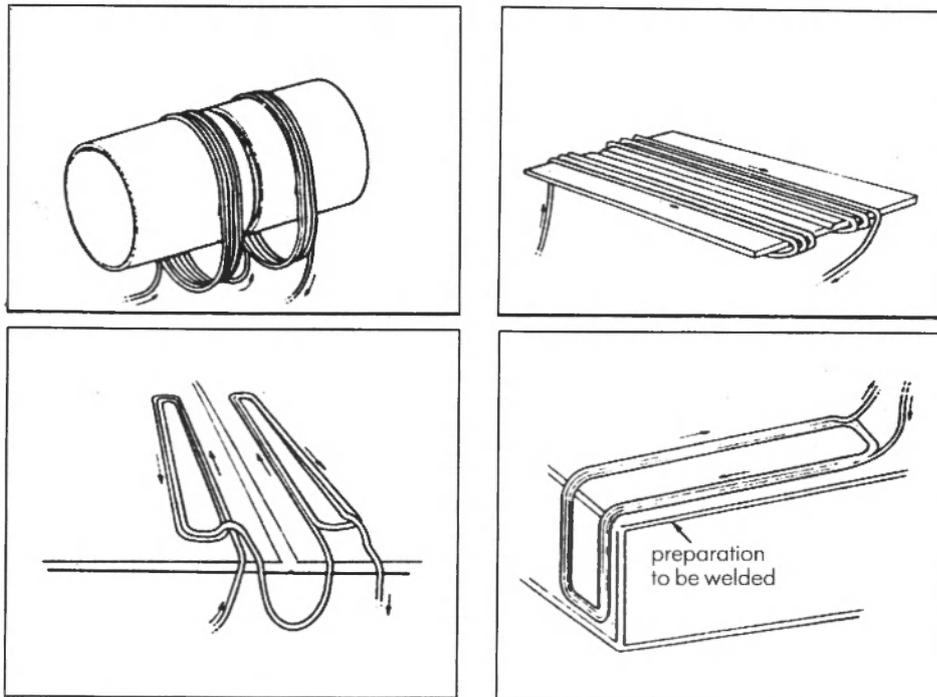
Demagnetising Cable configurations. Arrows indicate current directions, which should always be parallel to weld preparation
